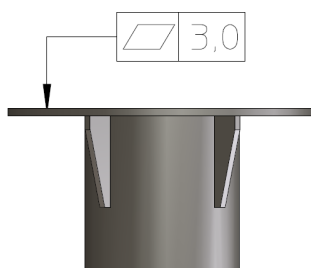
ADU mast flange, recommended flatness on the mast mount plateau
